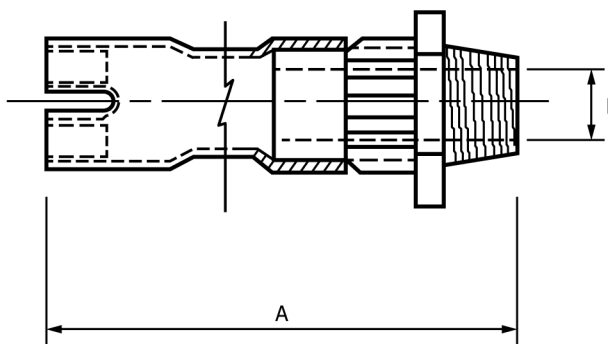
Type II-Multi-Legged Threaded Cable Entry Seals
